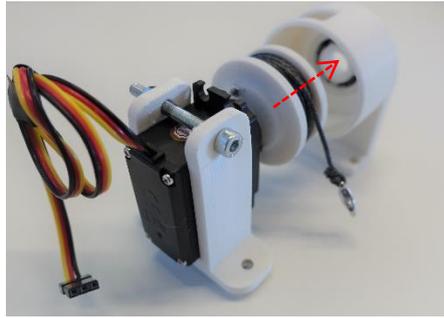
Servo and spool about to be pressed into the bearing placed in the spool holder. Arrow indicates direction of assembly.
